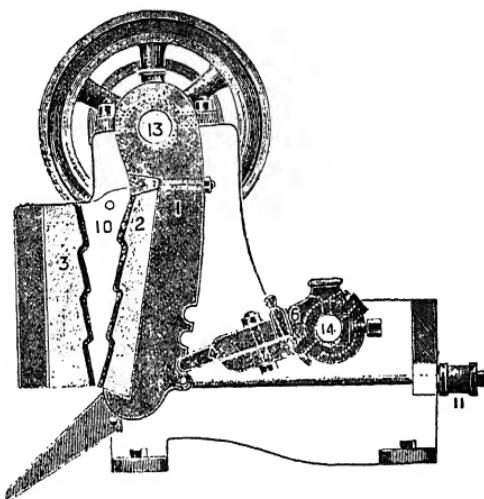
Simplex Combined Stone-Breaker, with Grinding Motion.
